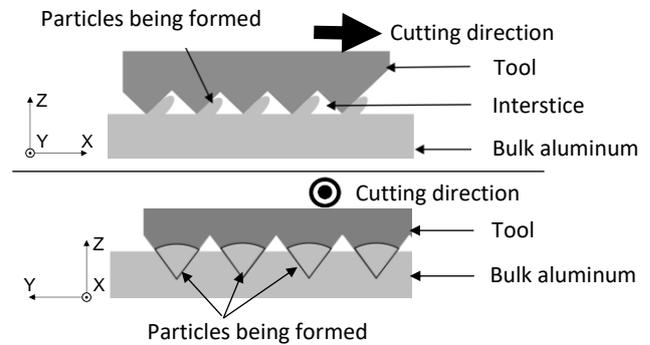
Forming of particles. Top: Side view, Bottom: front view
